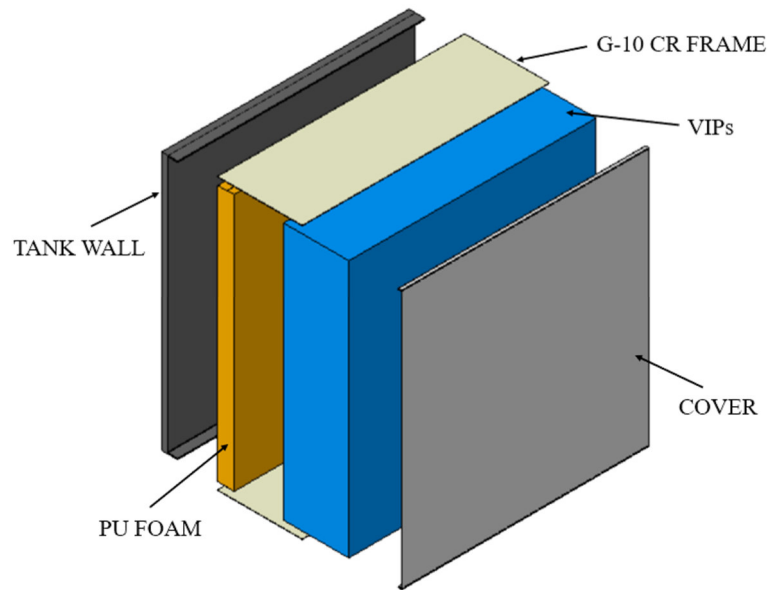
Exploded view of the novel insulation concept NIC_08, indicating the different structural materials and their assembly
